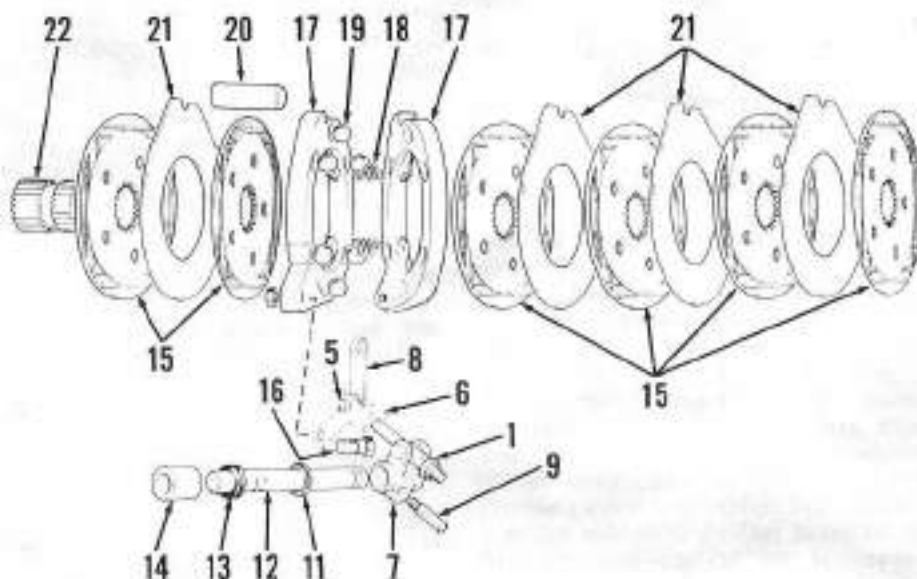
Exploded view of disc brake assembly. Side with four discs (T5) should be toward final drive housing when assembling. Hub (22) is keyed to pinion shaft (10—Fig. 735) with key (9—Fig. 135).
